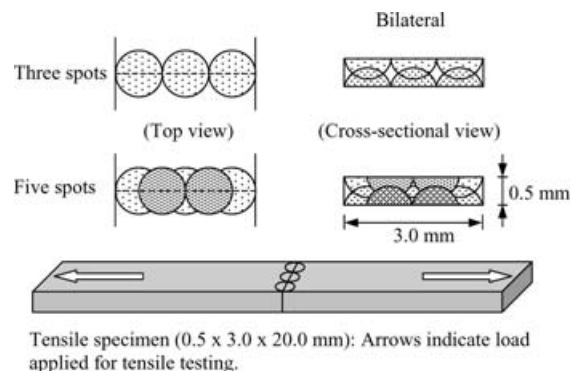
Laser welding configurations and tensile specimen used. Three or five laser spots were bilaterally applied perpendicular to the surface at the interface.
